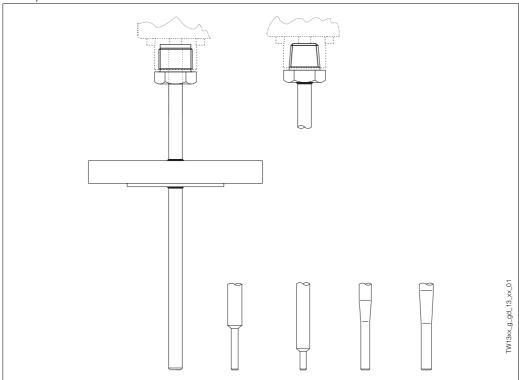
TW 13 with several types of process connections and end parts of the thermowell
